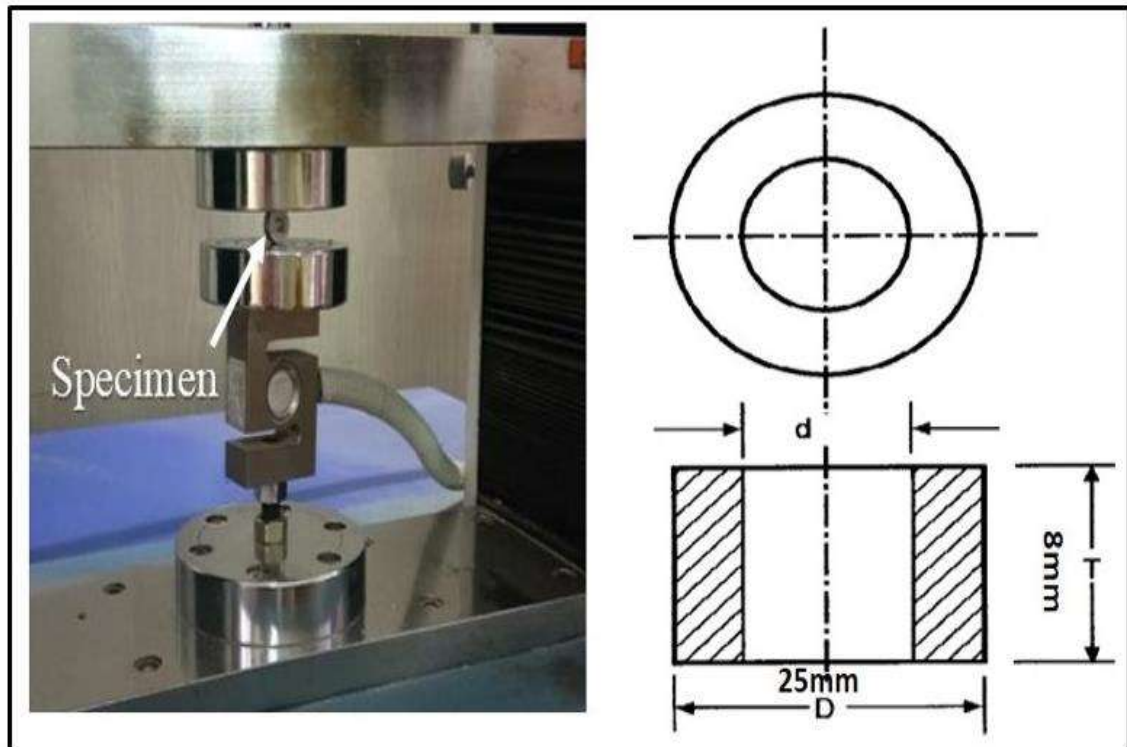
(a) DCS test set-up (b) schematic measurement of DCS test specimen
